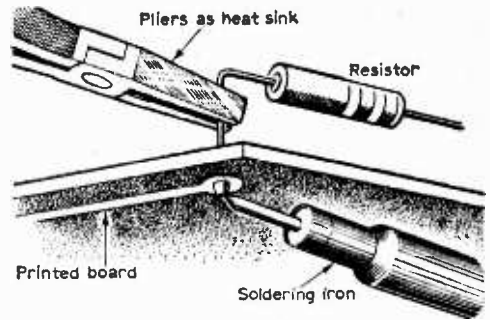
Prolonged heat must not be applied to the component when soldering, and it is essential to use a pair of pliers or other suitable tool as a heat sink.
